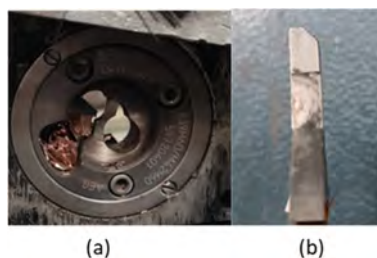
Typical defects of milling machines. (a) Milling machine covered by the chips from the electrodes. (b) Dull blade.
